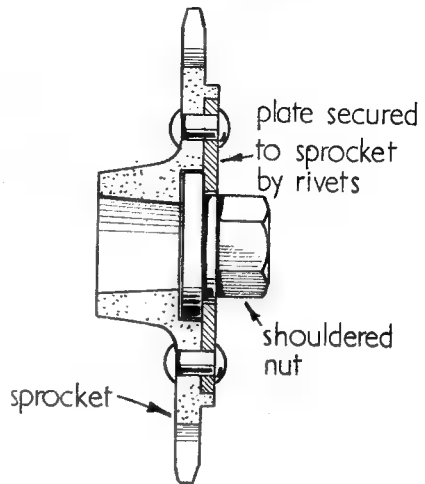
The Triumph patent self-withdrawing magneto sprocket
